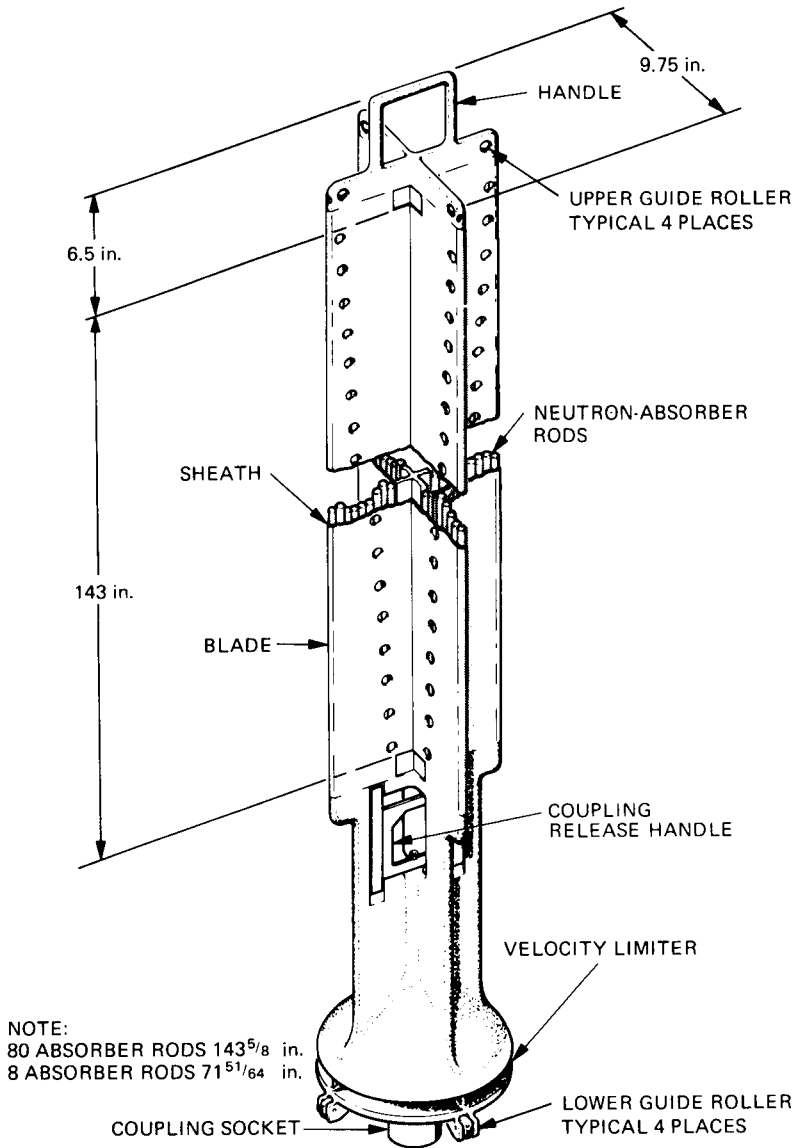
Boiling-water-reactor control rod with cruciform-shaped blade.
